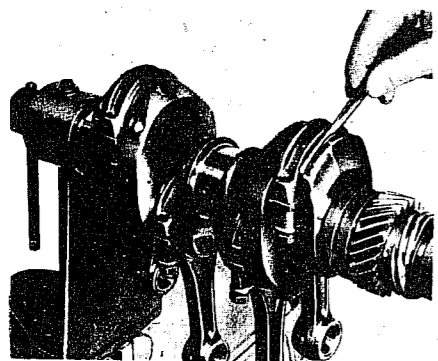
Checking the connecting rod axial play with a feeler blade.
